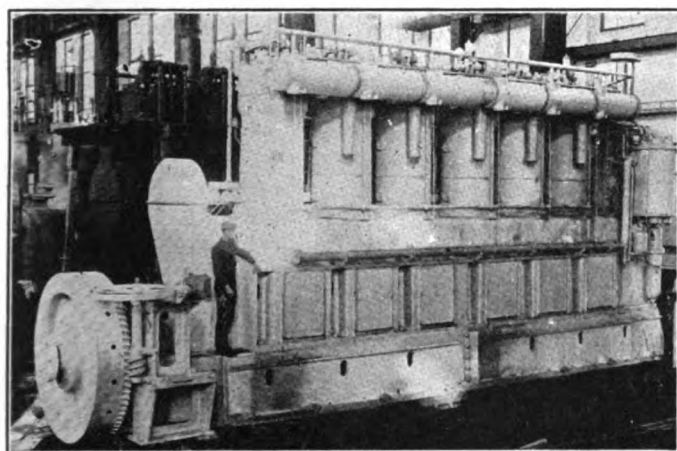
AN AMERICAN TRUNK-PISTON TYPE 750-B. HP. ENGINE
